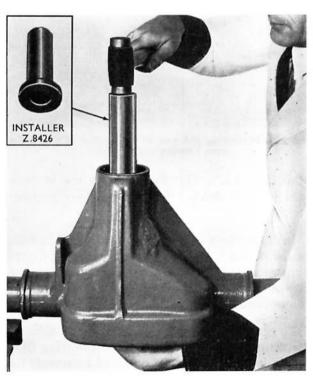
Installing the pinion front bearing inner race on the pinion shaft
